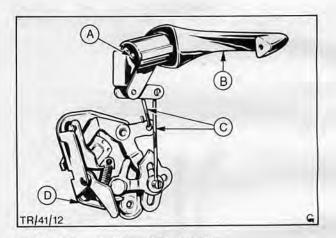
Exterior handle and lock assembly A - Operating plunger C - Control rods D - Lock assembly B - Exterior handle
